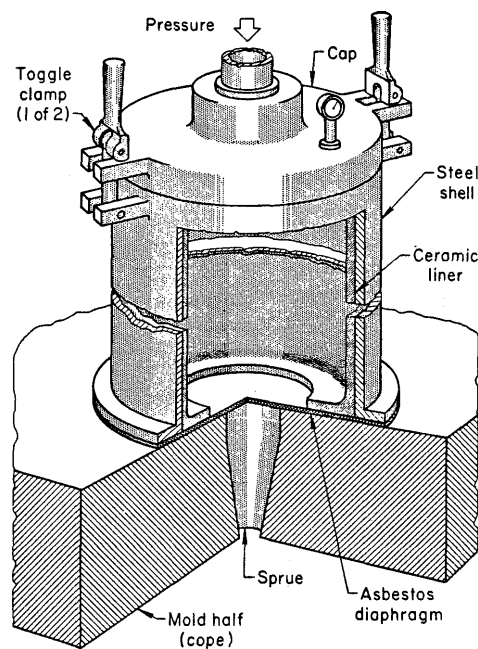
Cylinder used for pouring a casting with pressure assist.
